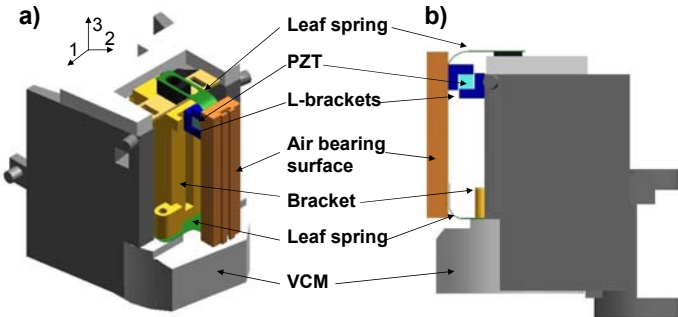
Mechanical design of dual stage actuator tape head a) isometric view and b) side view
